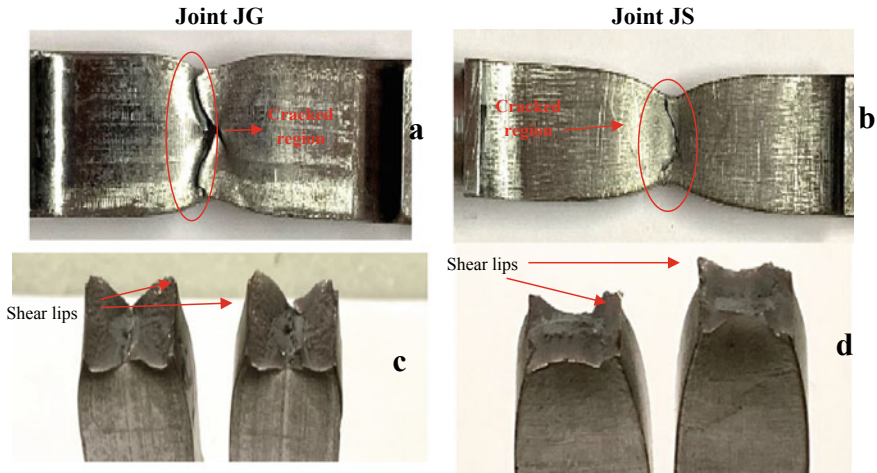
Optical fractographs of fractured tensile specimens of the welded joints
